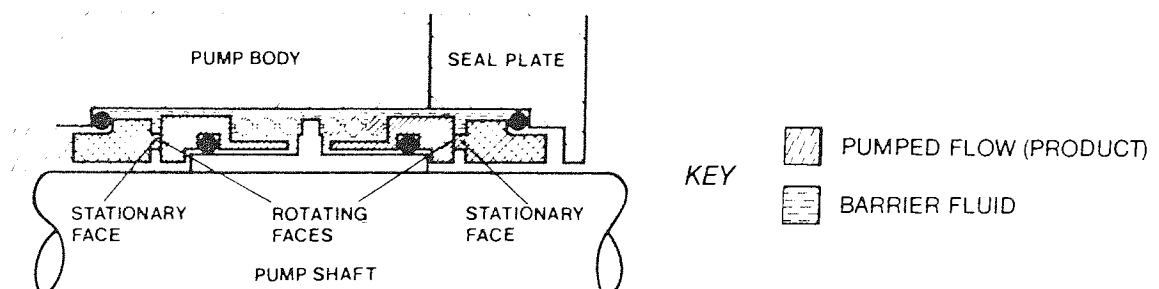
Double Seal arrangement for Mechanical Seals (13).
